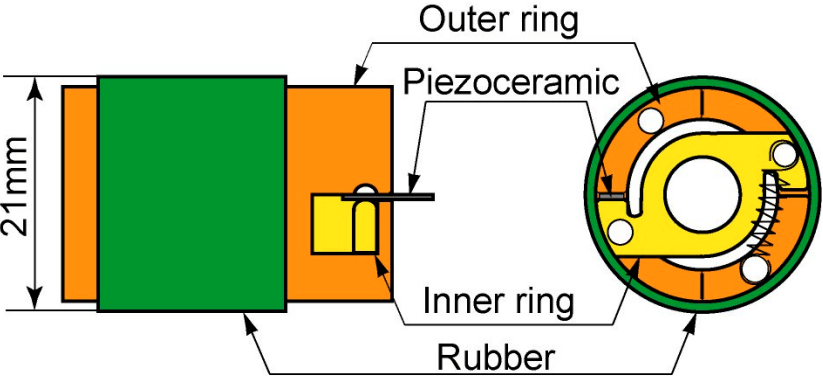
Schematic of the tactile sensor integrated roller (Roller type II)
